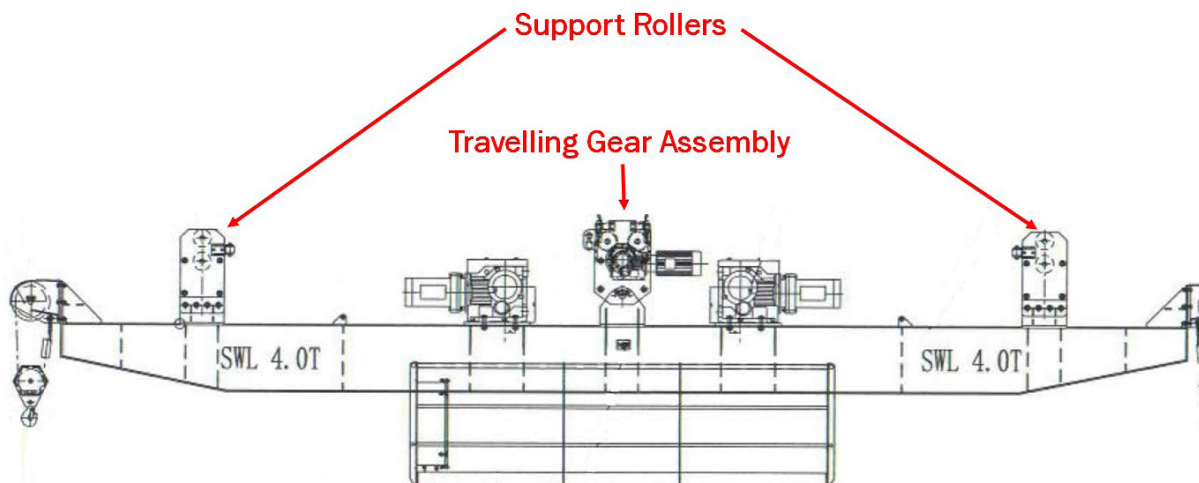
Diagram of the ECM40 provision crane installed aboard EAUBONNE, showing the travelling gear assembly and support rollers.
